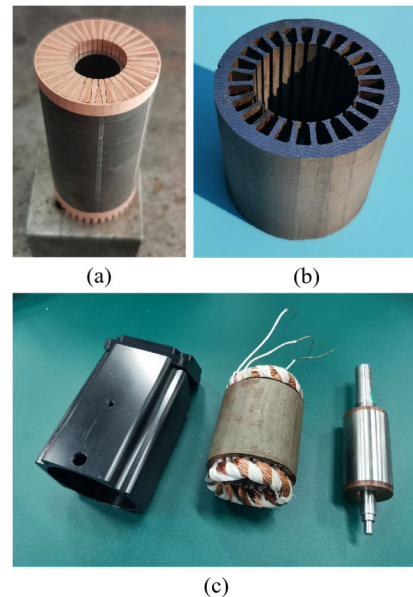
Cross sections and components of the prototype Motor-AO: (a) rotor, (b) stator and (c) components.
